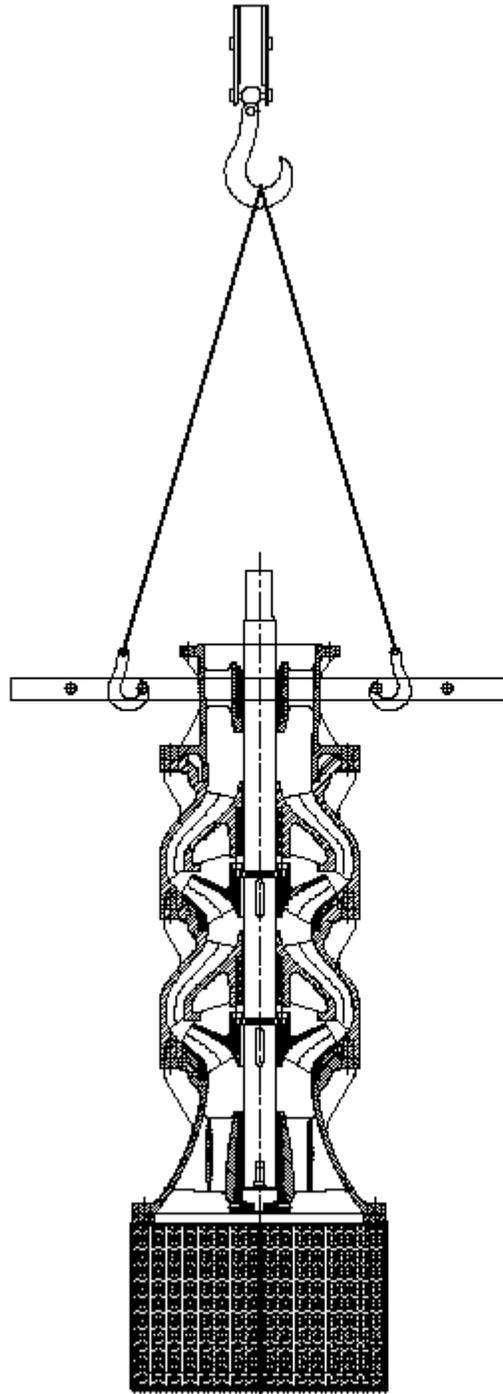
REMOVAL OF BOWL ASSEMBLY.
